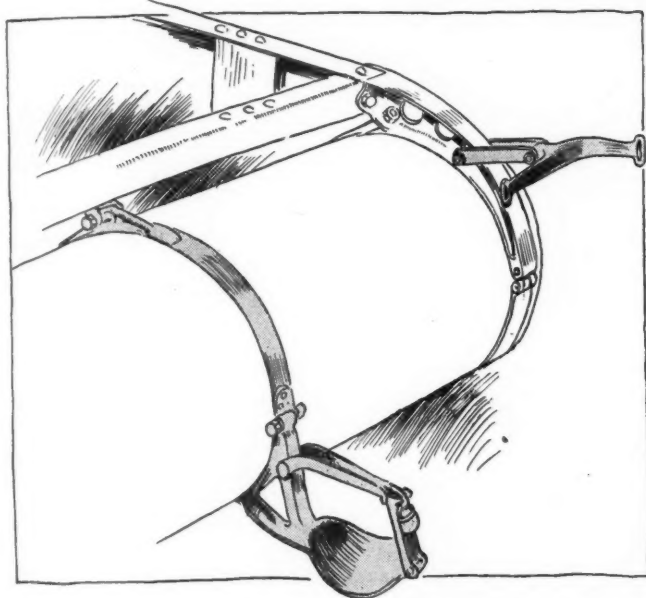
Method of attaching tire carrier to tank on Edwards-Knight
